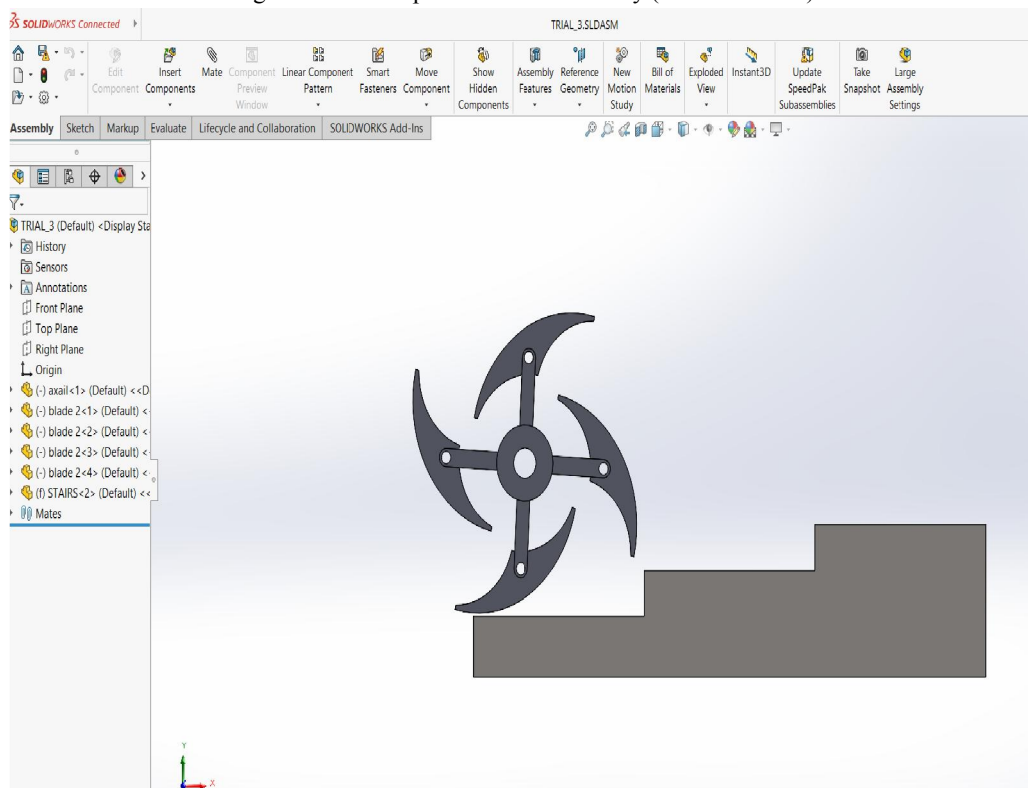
Wheel & Stair case Assembly (wheel 2 case 2)
